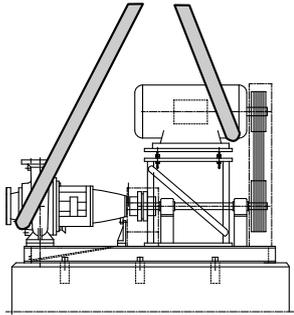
Pump set on baseplate with counter shaft and belt drive (figure 3H)
